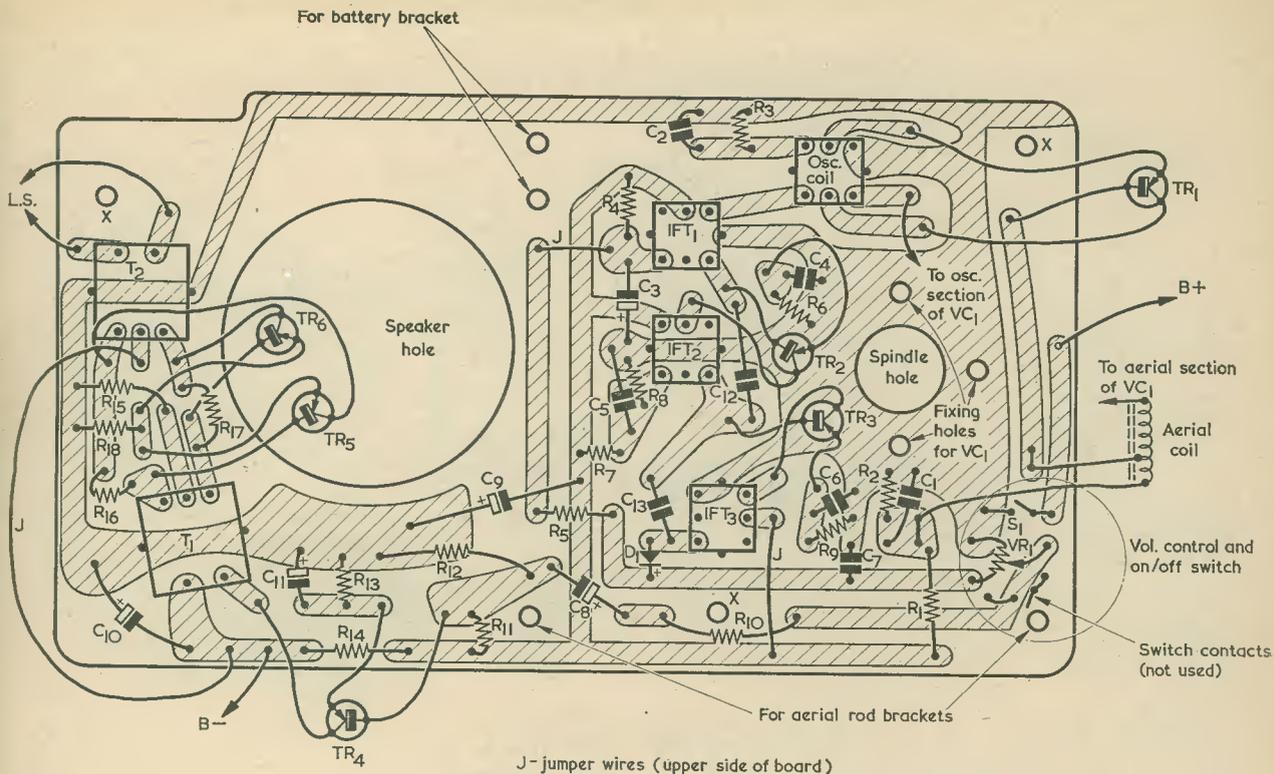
The copper side of the board. This diagram is reproduced full size and may be employed as a template
